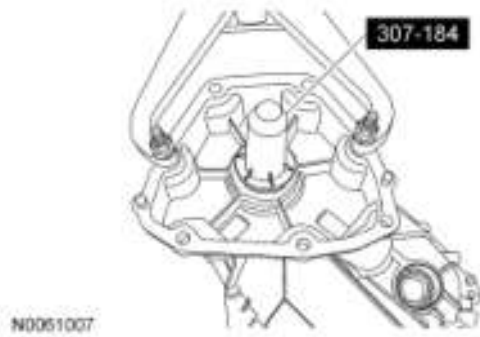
Installing Seals In Front Transfer Case Using Special Tool (307-184)
